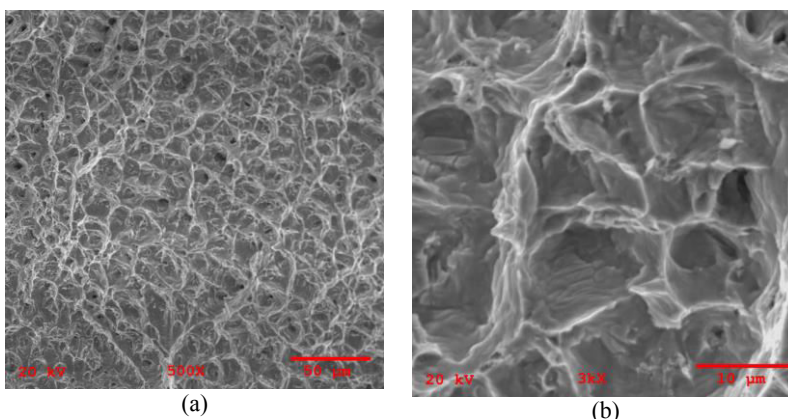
SEM fractographs showing the impact fracture surface of HAZ of SAF 2205 alloy (a) and coarser dimples (b).
